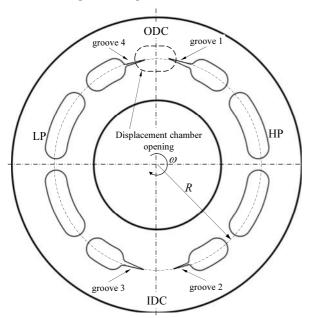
Valve plate with grooves showing the displacement chamber opening
